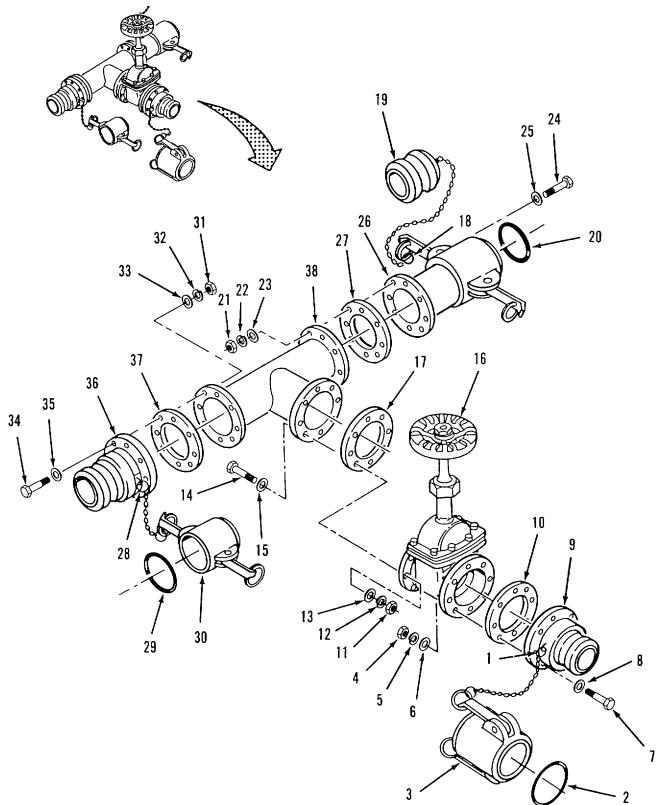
Tee and Gate Valve Assembly (9114-Y1) Assembly.
